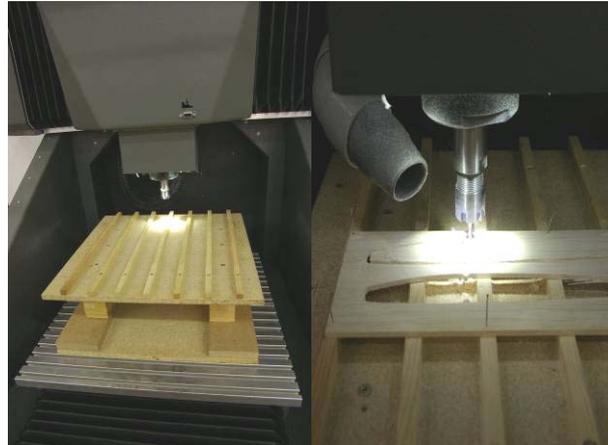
Clamping appliance of HWT C-442 CNC Profi milling machine
